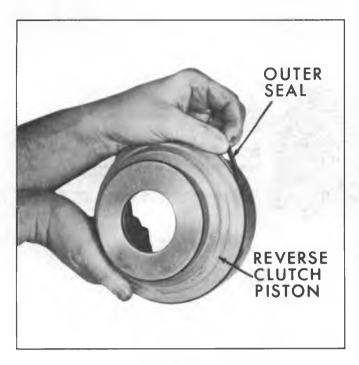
M-Removing Low and Reverse Clutch Piston Outer Seal
